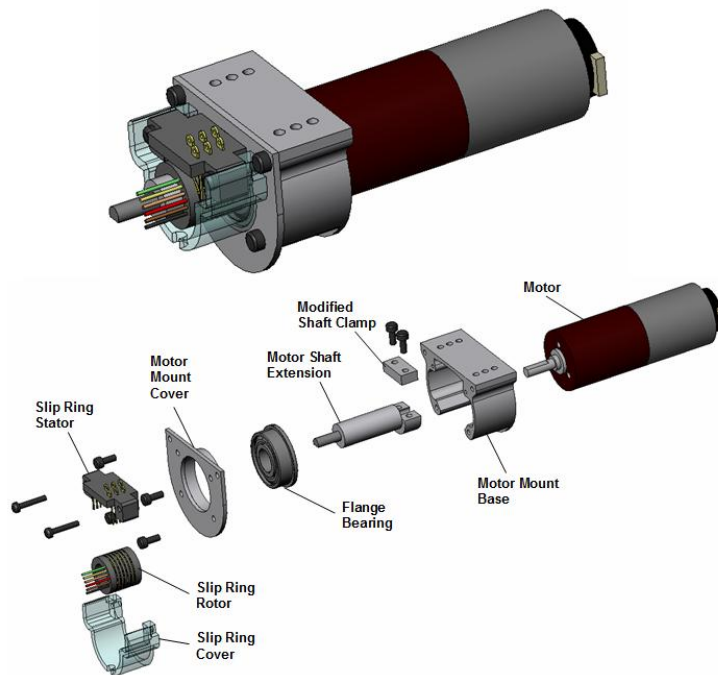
An assembled and exploded view of the slip ring incorporated into the motor assembly to allow legs to continuously rotate and source power from the robot power supply.
